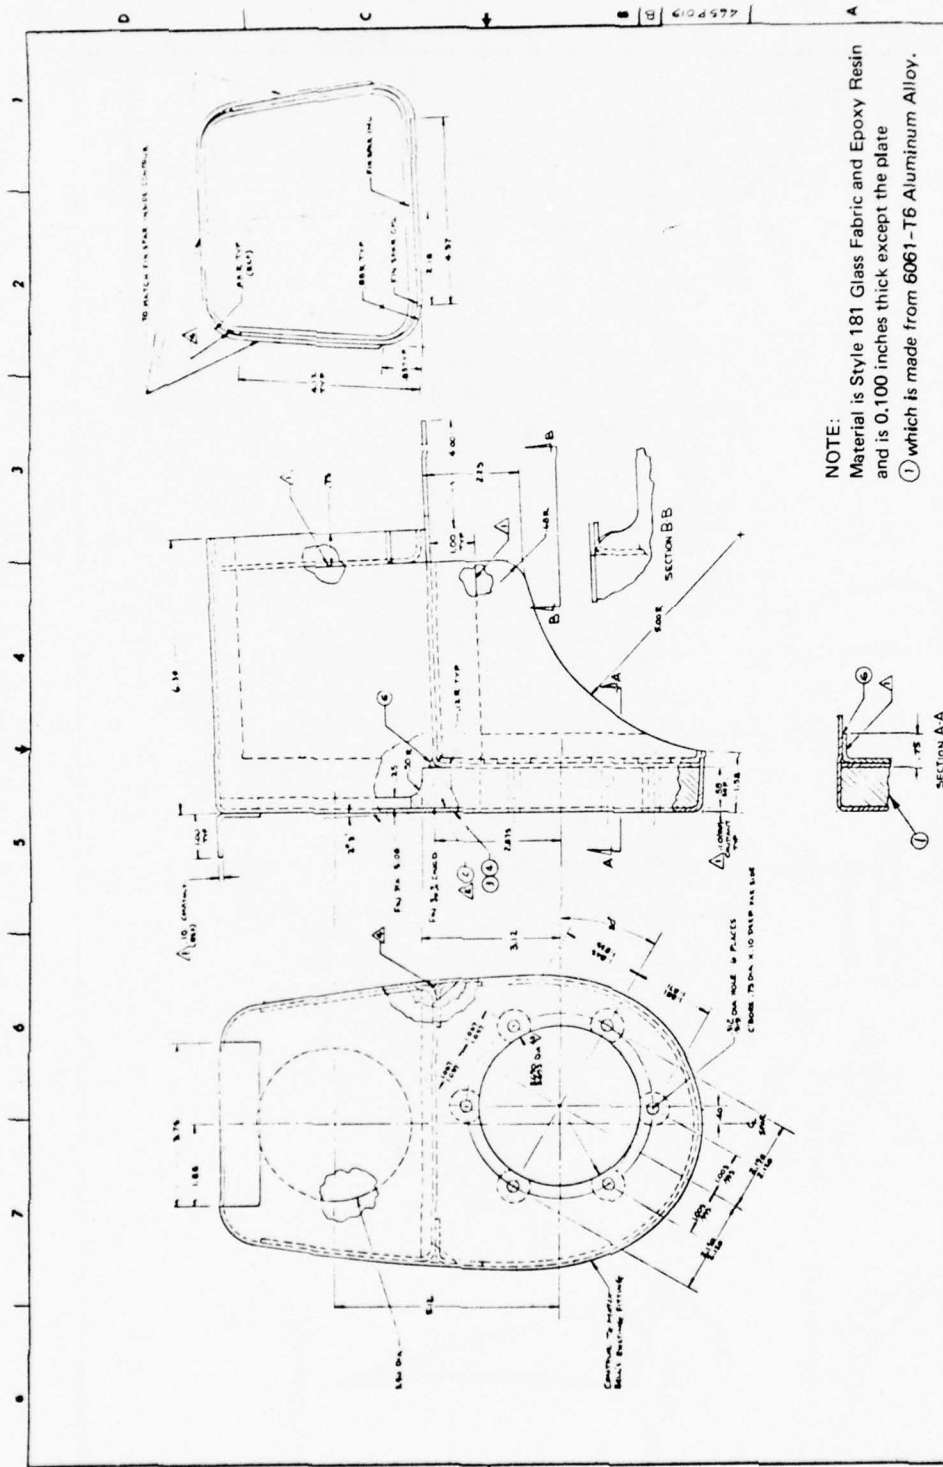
Tail Rotor Gearbox Mounting Bracket.
